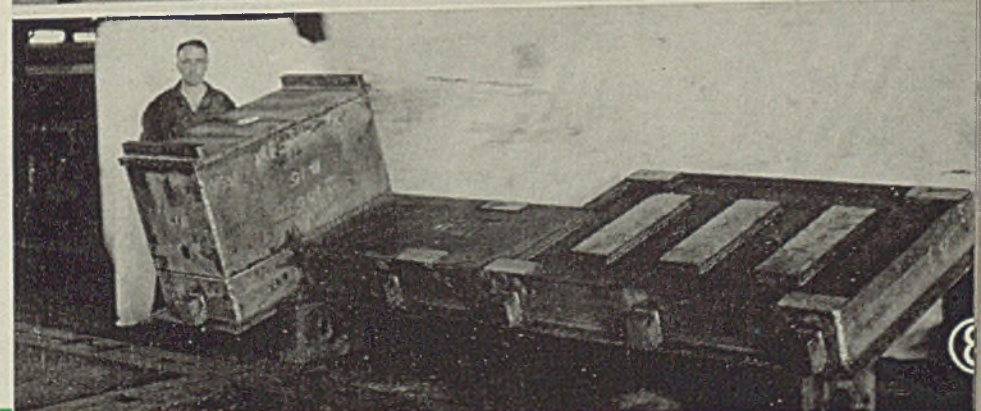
This ram for a 28,000-pound press brake was fabricated from rolled plate, flame cut and arc welded
